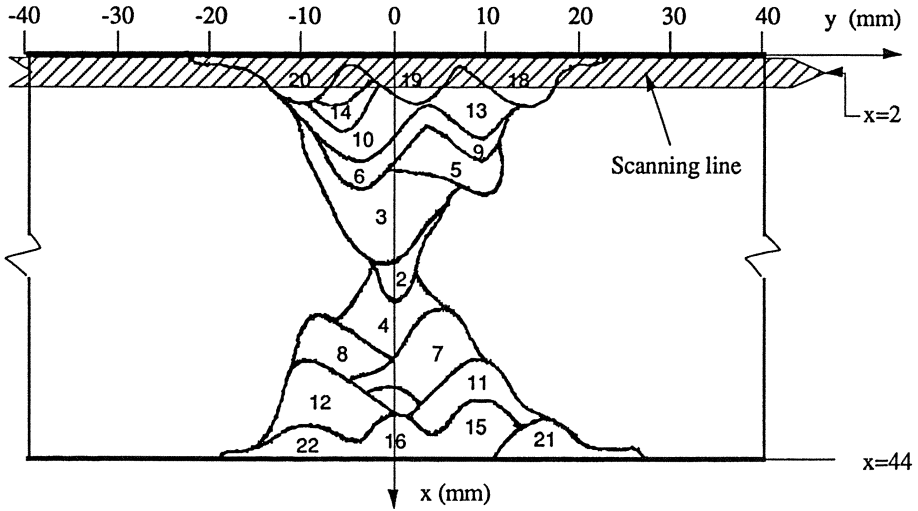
Joint design and pass sequence for the aluminium alloy double-V MIG weld [6].
